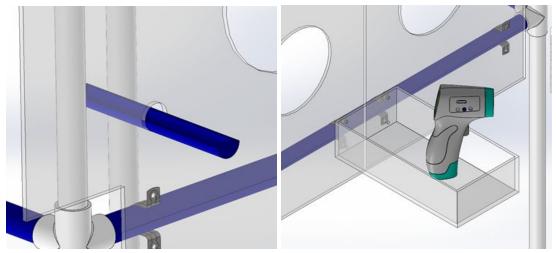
Dimensions of Arm Holes in Concept - v2.3
